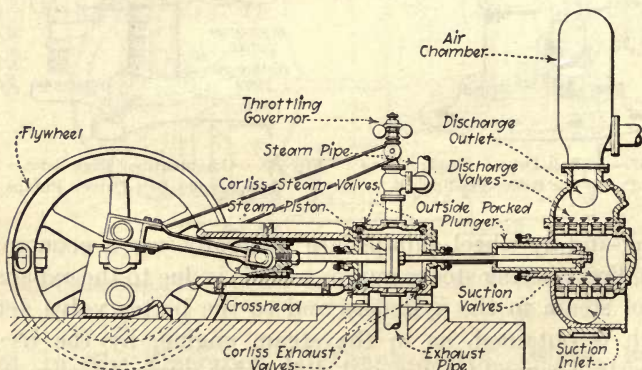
Single-Acting Crank-And-Flywheel Pump For Hydraulic Elevator Service.
